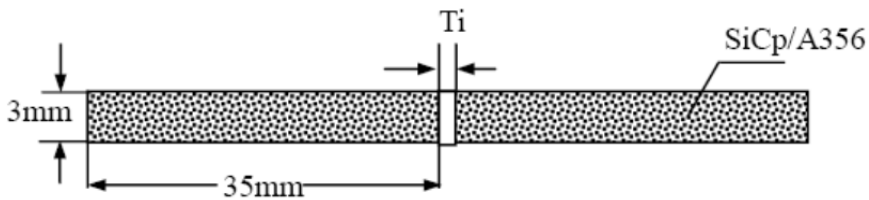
Schematic illustration of laser welding with Ti filler
